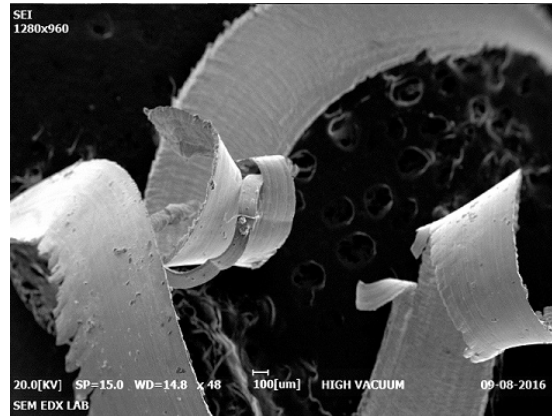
SEM Images of Cryogenic CO₂ machining with cutting length of 90mm and machining duration 5 min (cutting speed-70.37 m/min and feed-0.150 mm/tooth)
